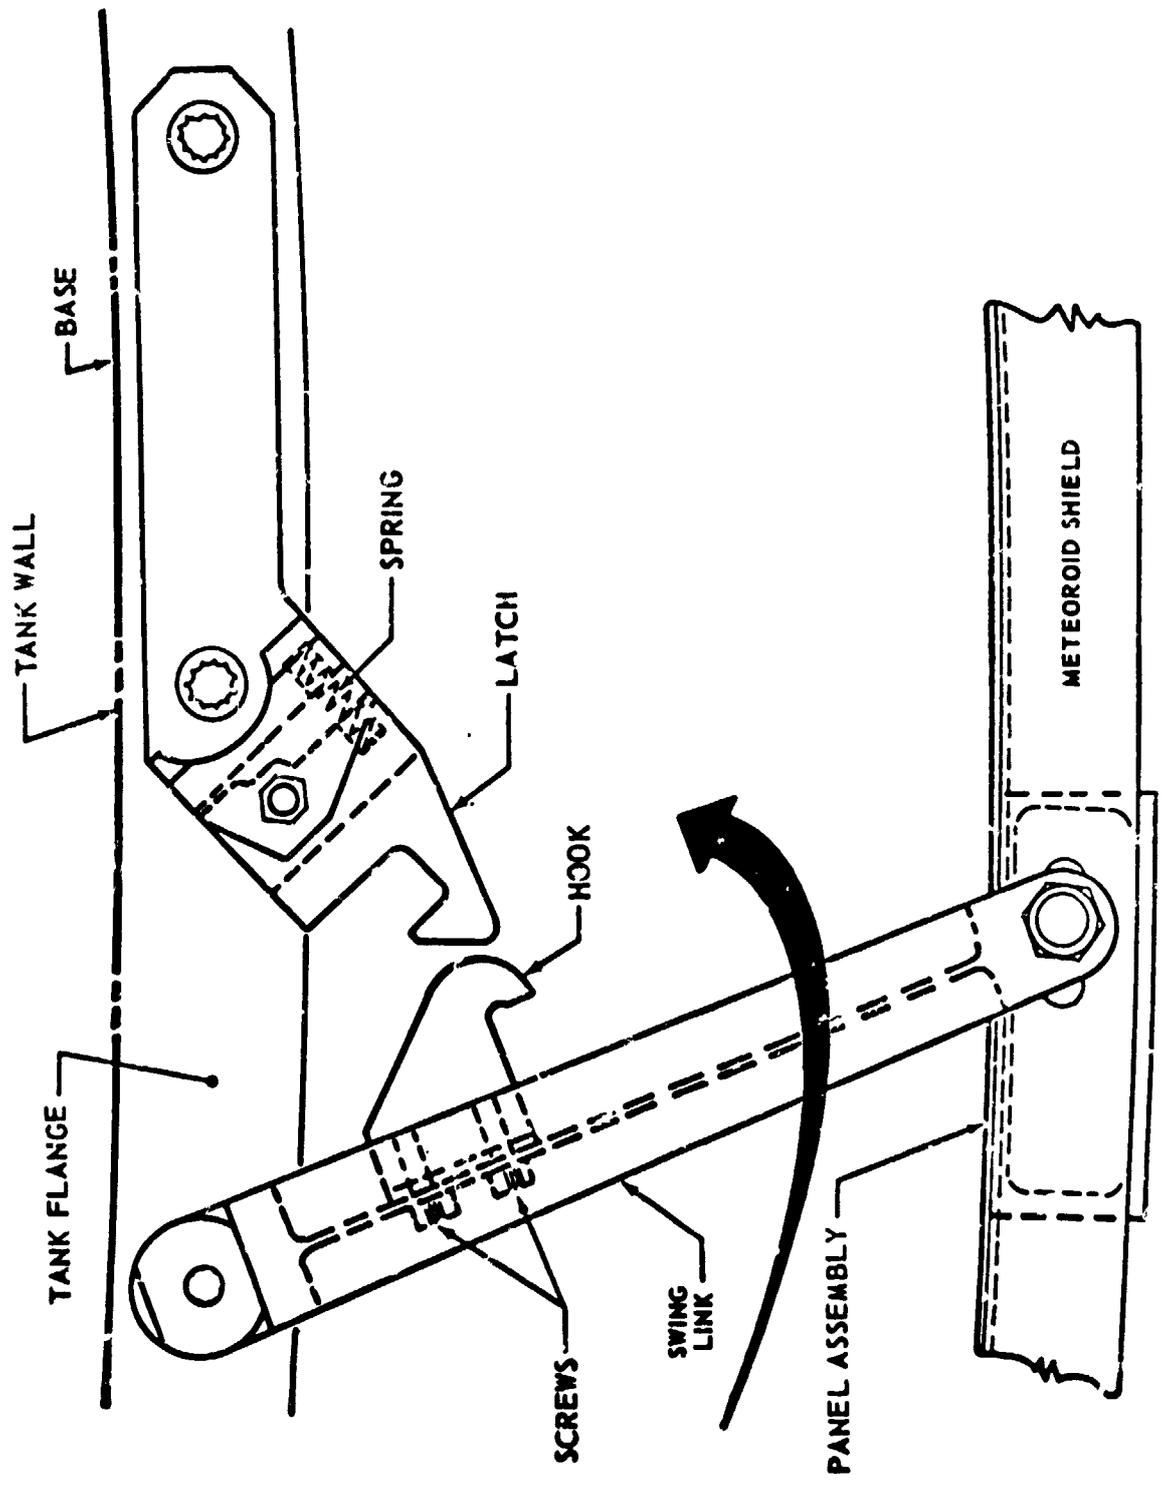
Meteoroid Shield Deployment Latch Assembly
